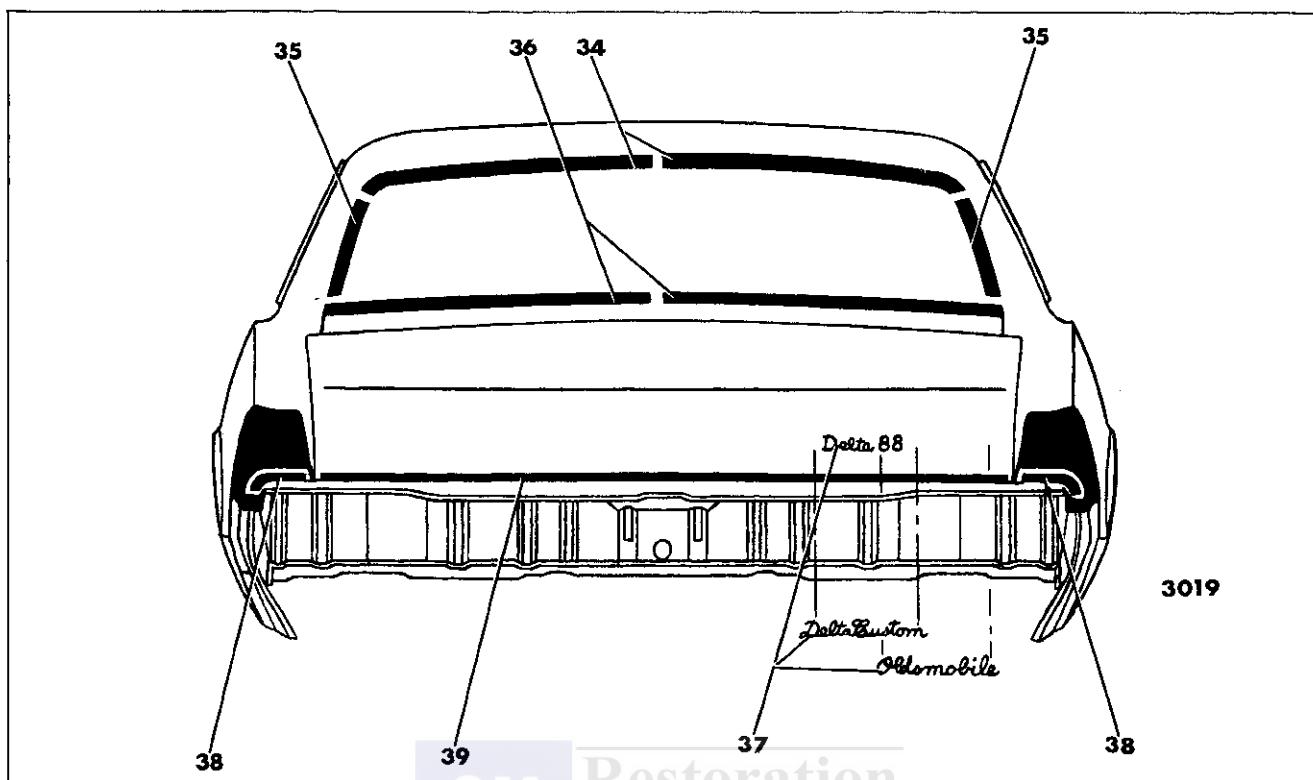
Oldsmobile 35600-36400-36600 Styles
